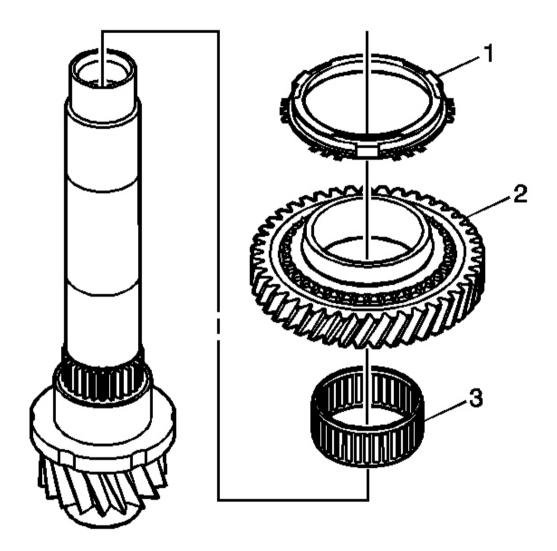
Caged Needle Bearings, Reverse Gear & Blocking Ring Courtesy of GENERAL MOTORS CORP.
